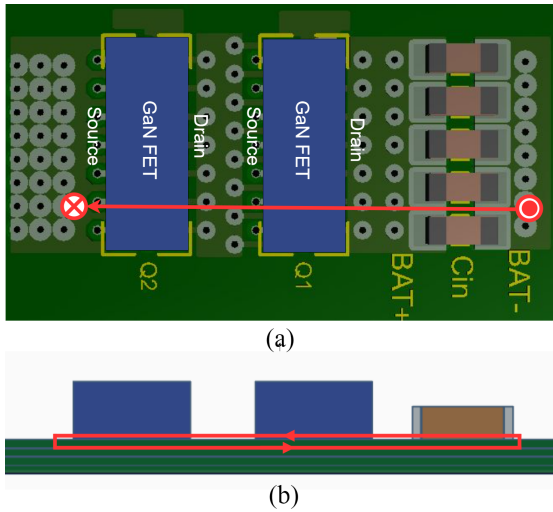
Optimum PCB Layout (a) Top view; (b) Side view.
